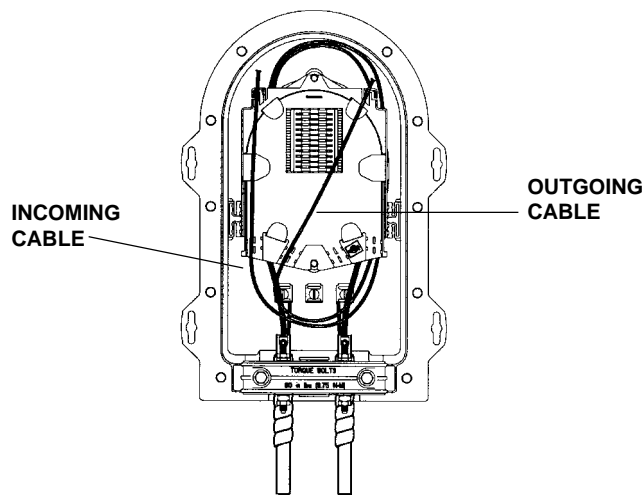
LAY BUFFER TUBES OR TRANSPORT TUBES IN SPLICE ENTRIES should enter the angled entry slot. (Figure 23)
